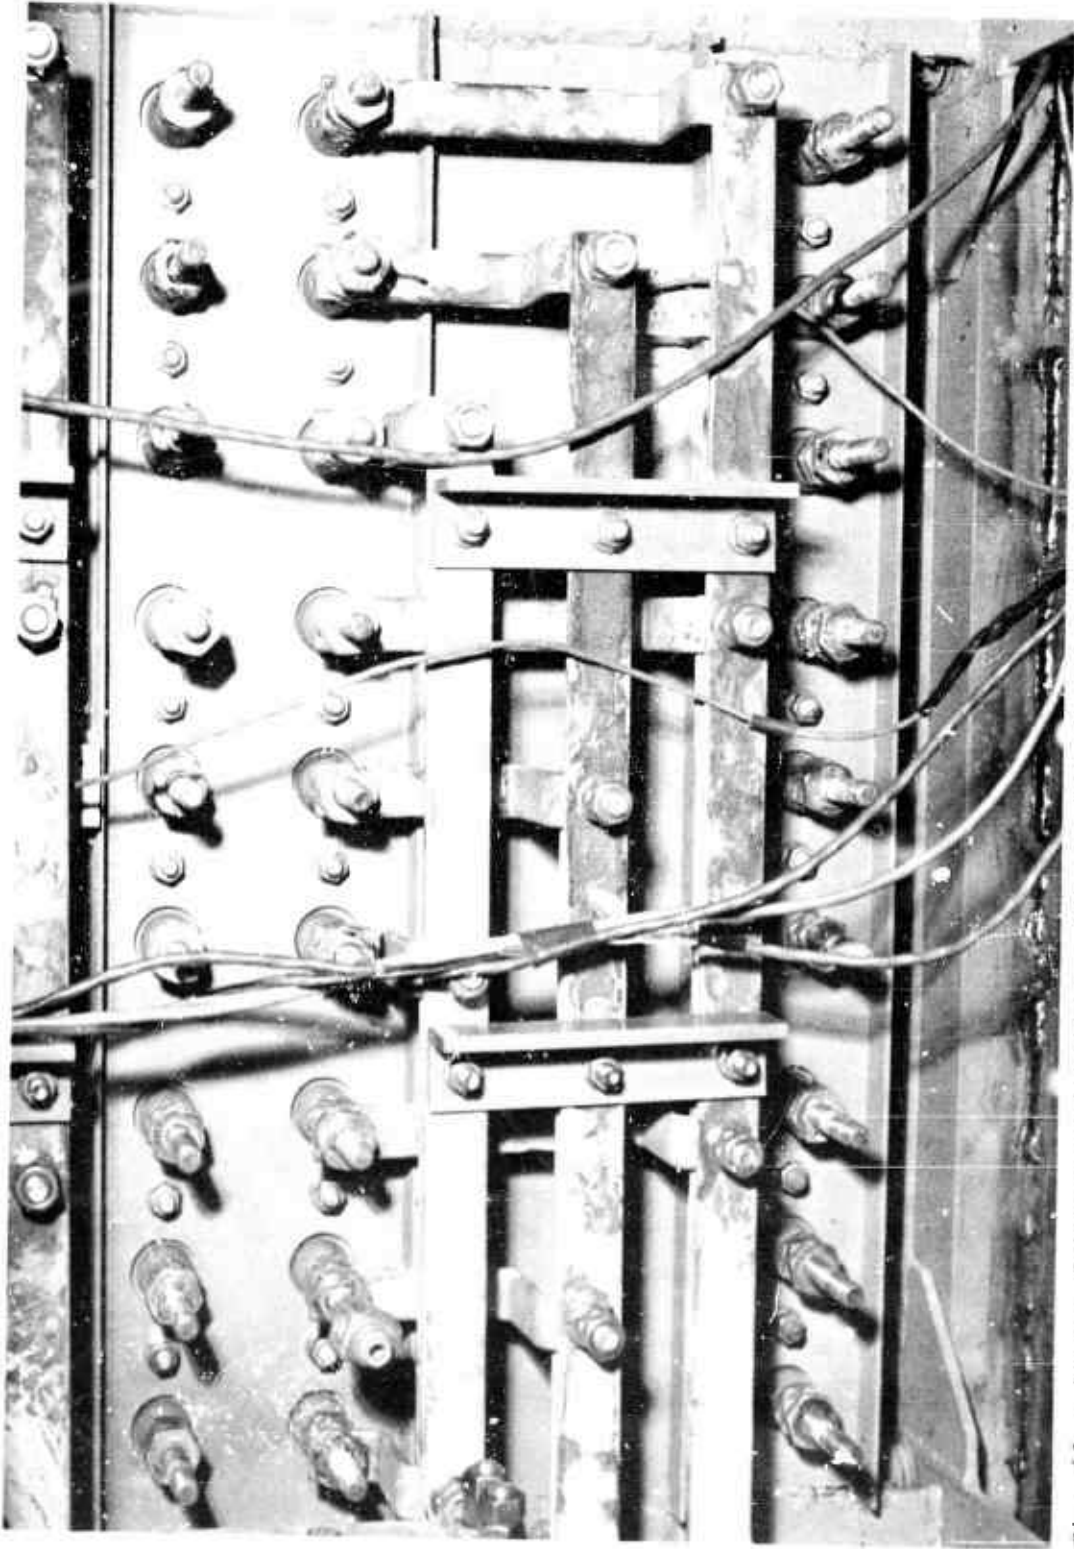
Damage from Vertical Shock - AQB Breaker Bay (Rear). Note cracked welds at each end of the lower frame member. (After Blow 3).
